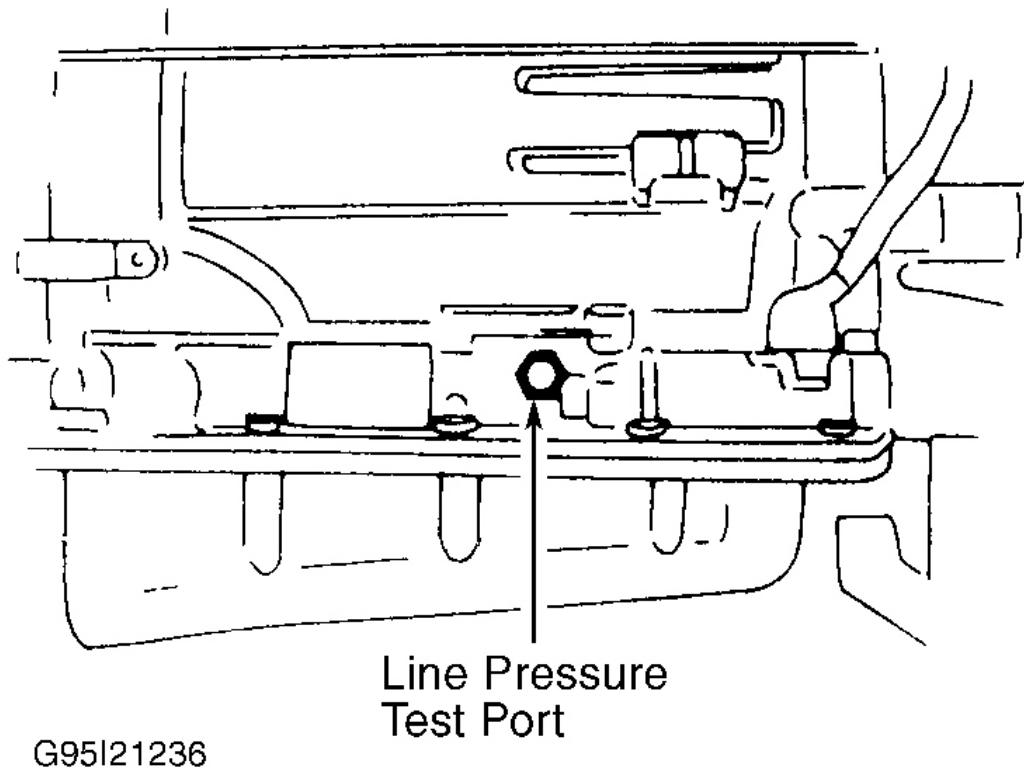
Identifying Transmission Hydraulic Pressure Test Port
